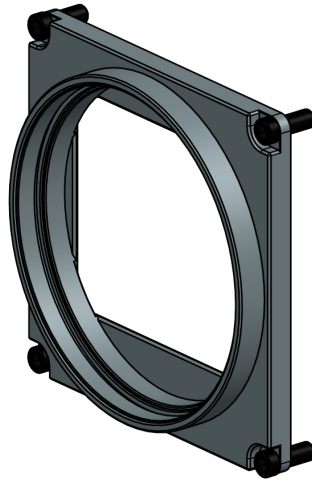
Isometric view of Lens Adapter ME-LA-80MM-M72-L
